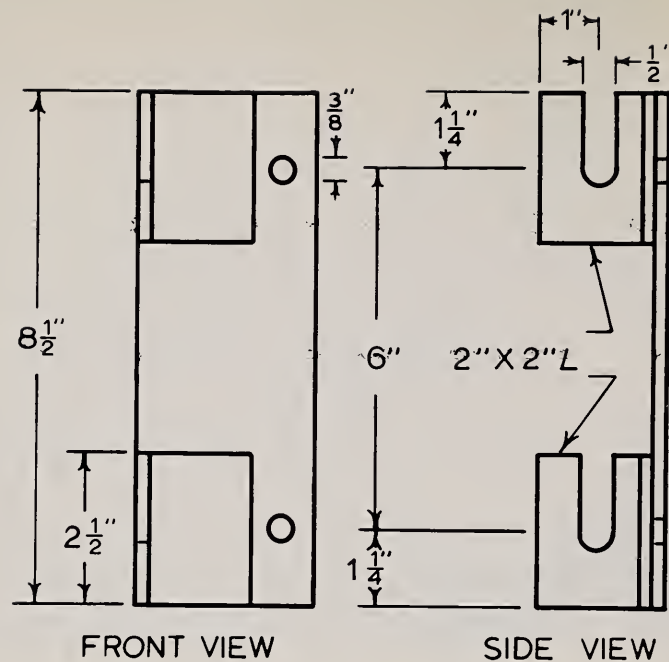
Brackets for mounting sacking attachment in picker basket. (Right-hand bracket shown; left-hand bracket required on other side.)
